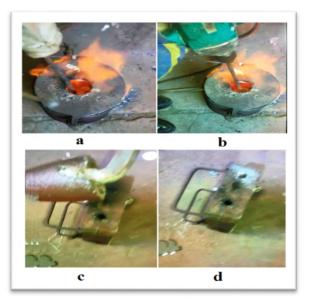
Stir casting process; a: furnace Ignition and metal melting; b: move the nanoparticles with molten metal; c: the melt poured into the mold; d: composites product into mold.
